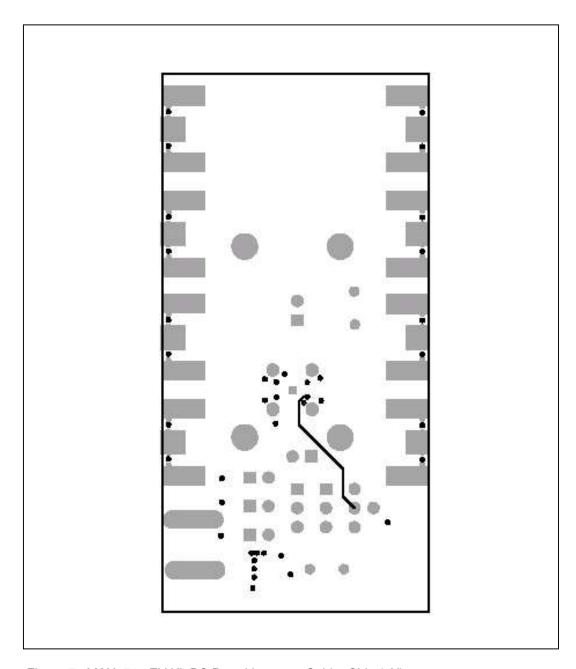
MAX3746 EV Kit PC Board Layout – Solder Side (2X)
